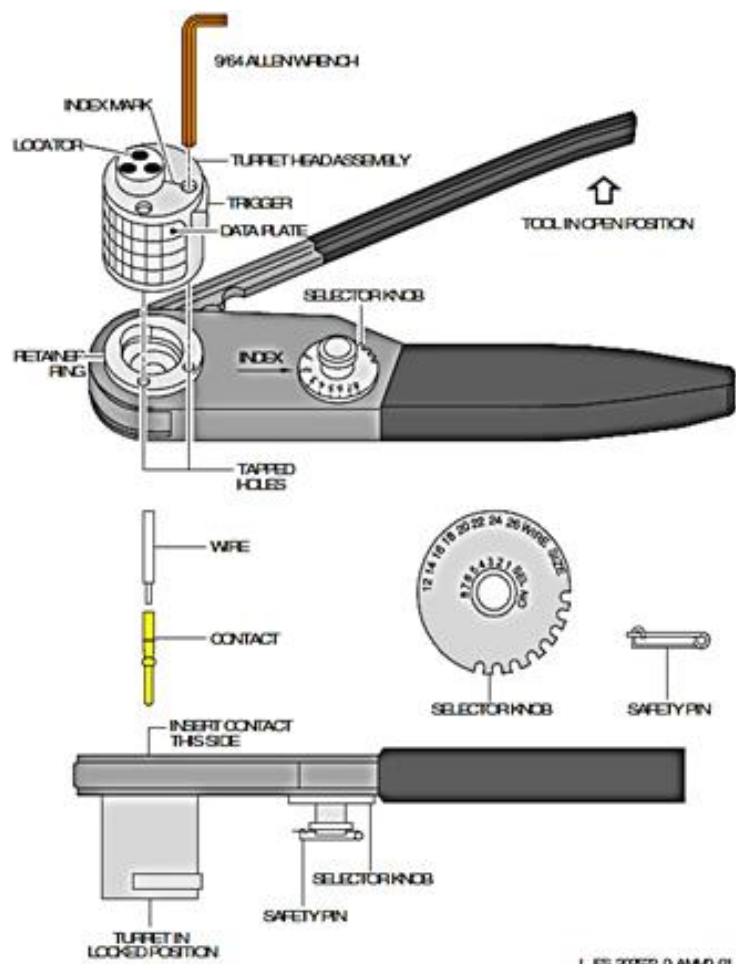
(Sheet 1) / 20-25-22 - Hand Crimping Tool M22520-1-01
